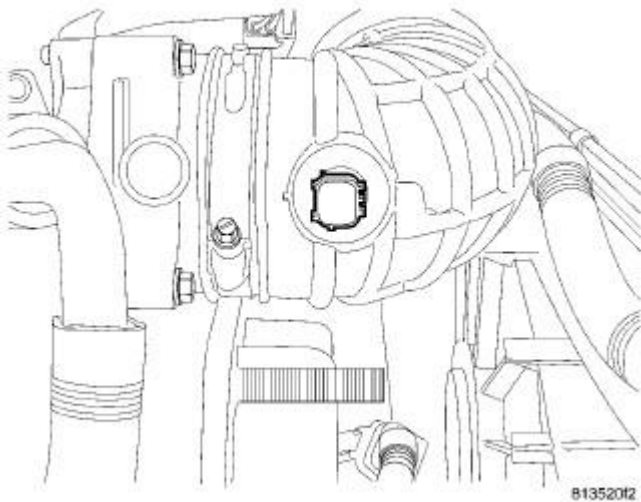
Identifying Inlet Air Temperature Sensor - 5.7L
